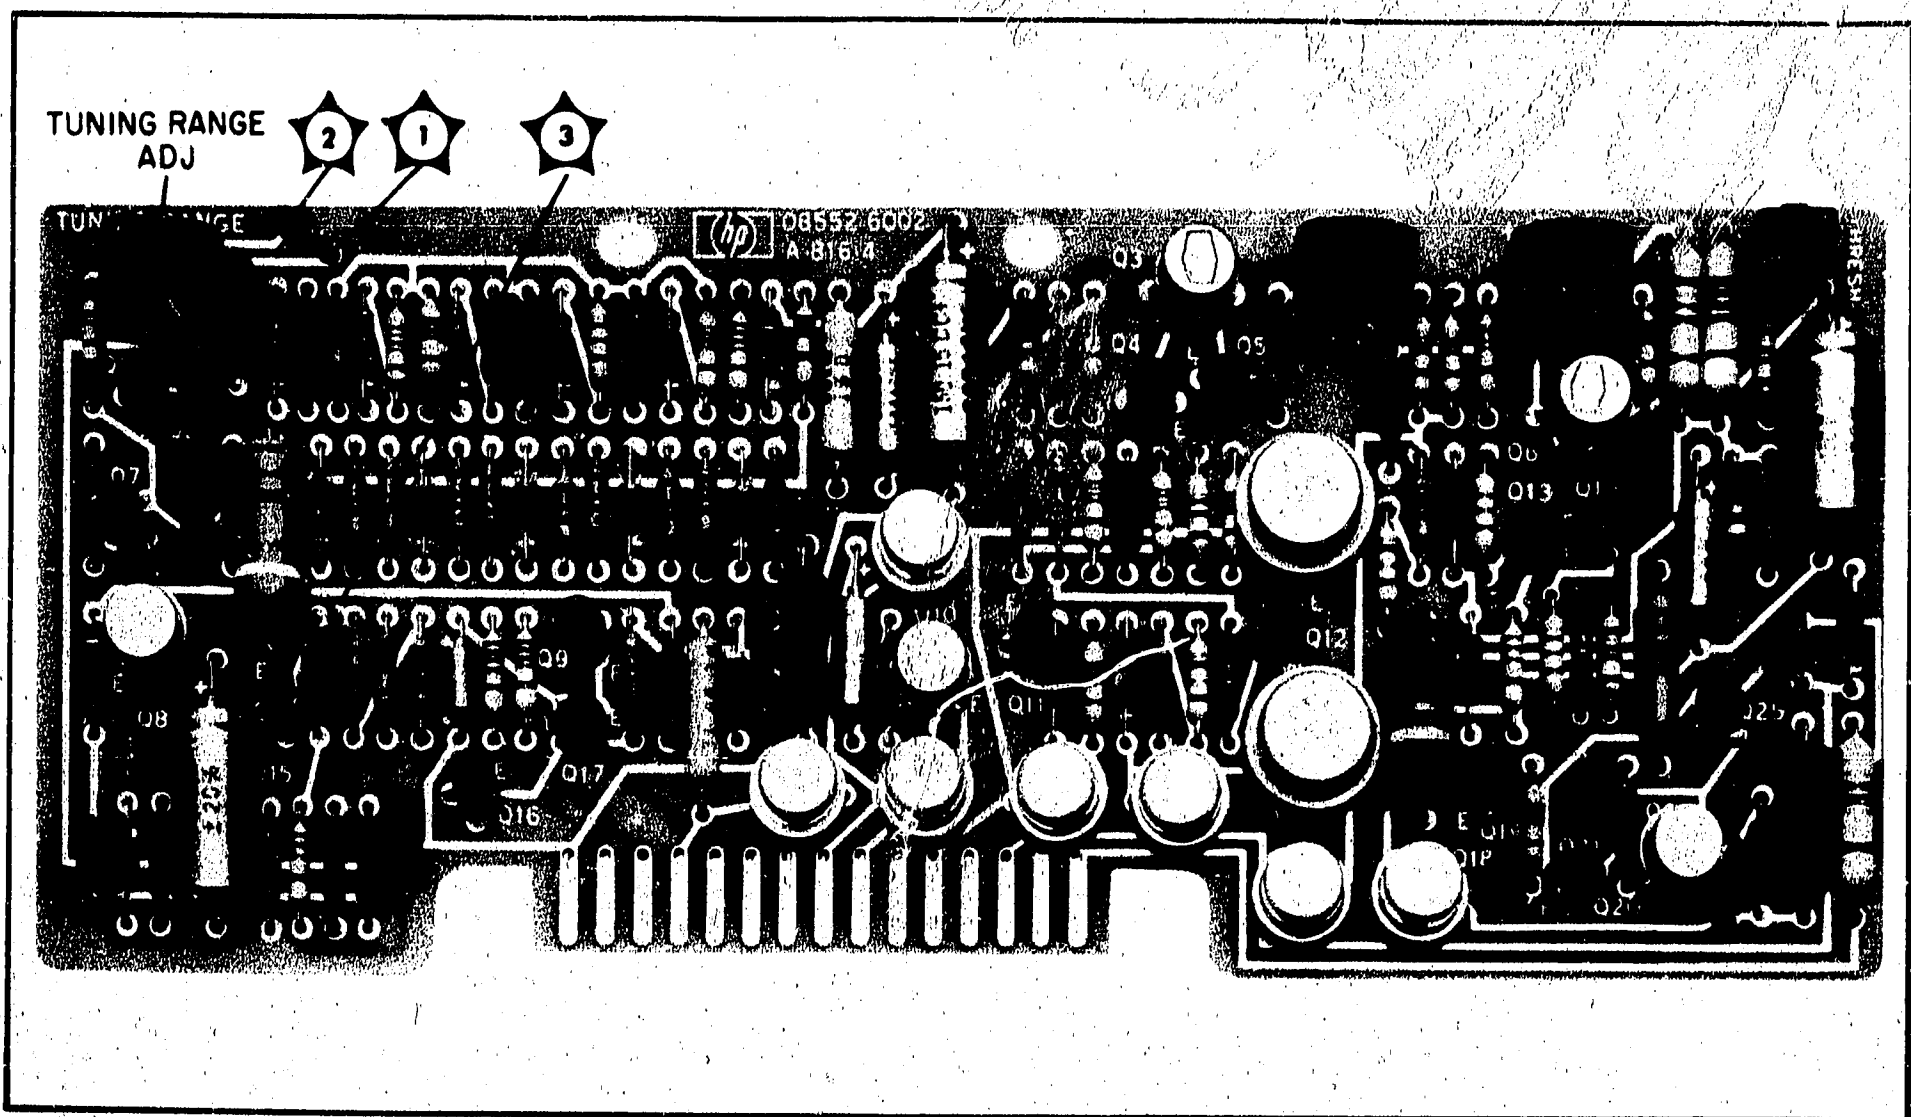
P/O Power Supply Assembly A5 Test Point and Adjustment Identification
